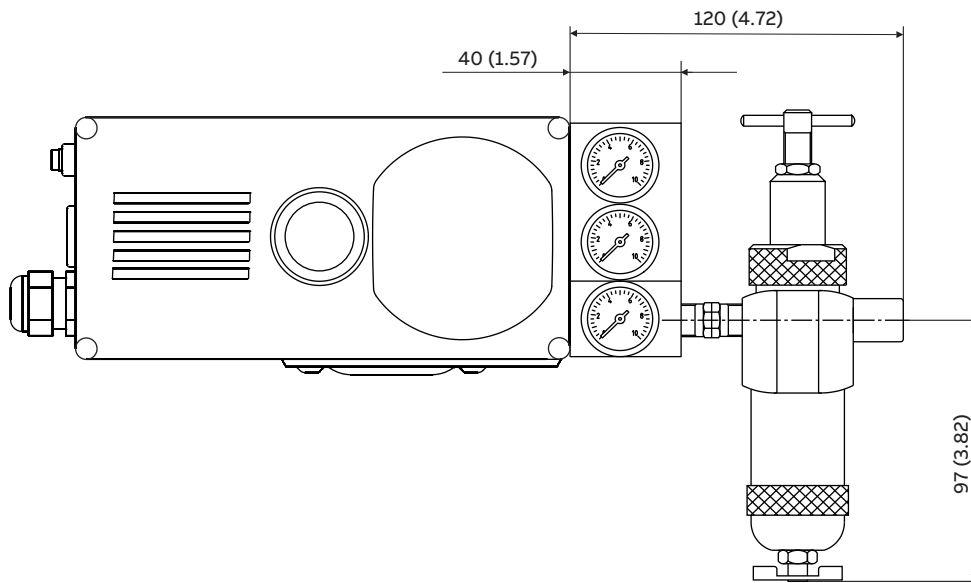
EDP300 positioner with pressure gauge block and filter regulator mounted
